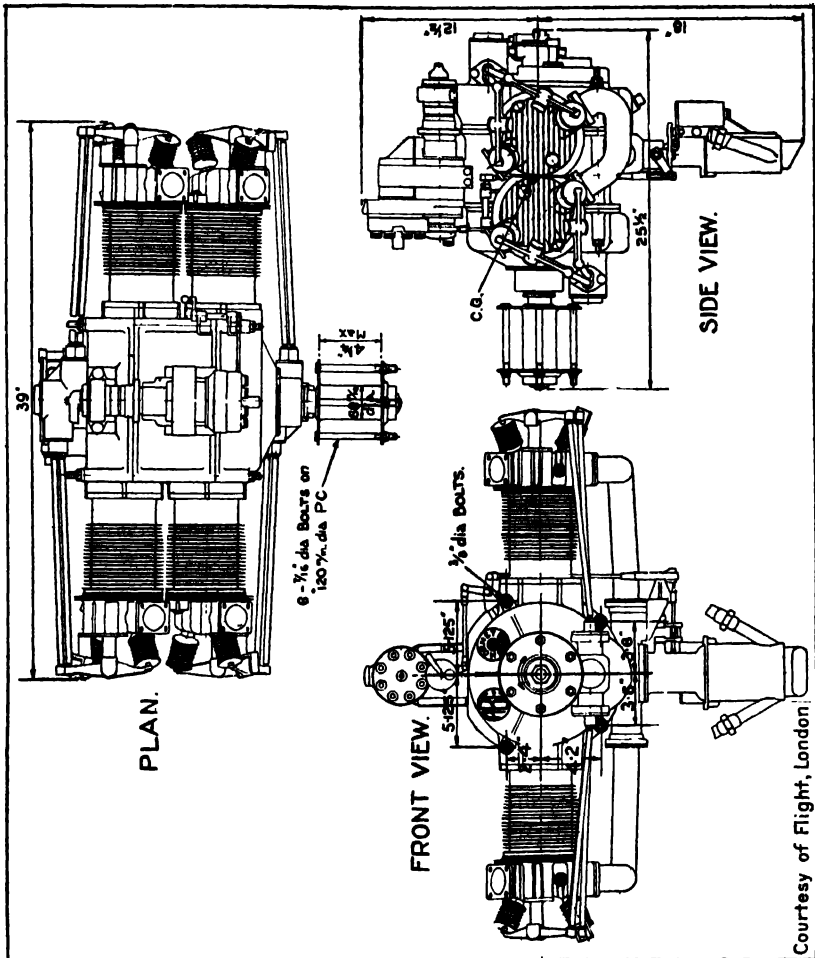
C.—Three View Drawing of the A.B.C. Four-Cylinder Air-Cooled Hornet Engine Showing Main Dimensions Necessary for Installation in Airplanes.
